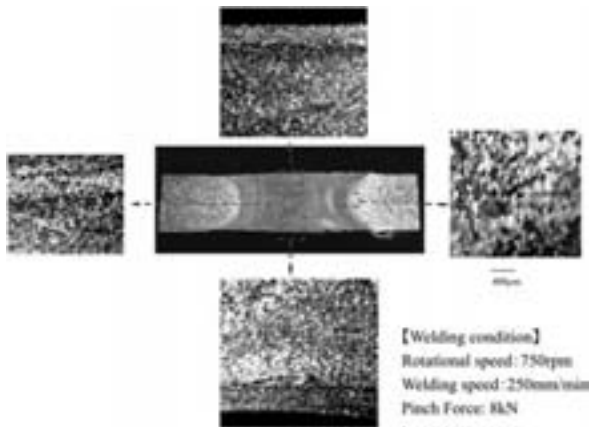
Macrostructure of welds by the self-reacting tool.
